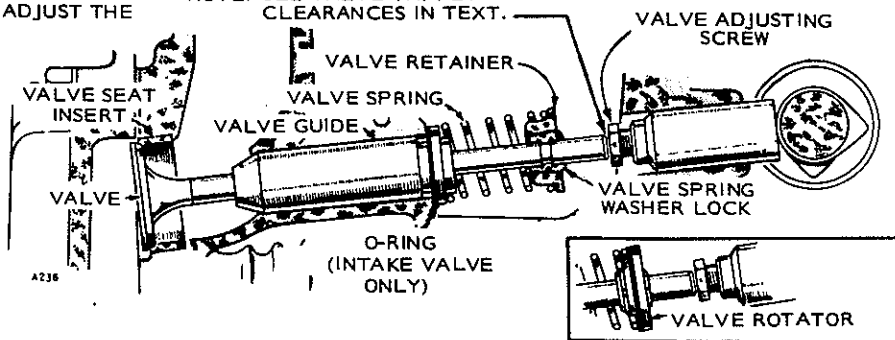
VALVE ASSEMBLY — ALL TWO-CYLINDER OPPOSED-PISTON ENGINES
